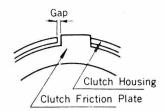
Gap between clutch housing (3—Fig. K1-12) and friction plates (7) should be (0.0016-0.012 in.).
